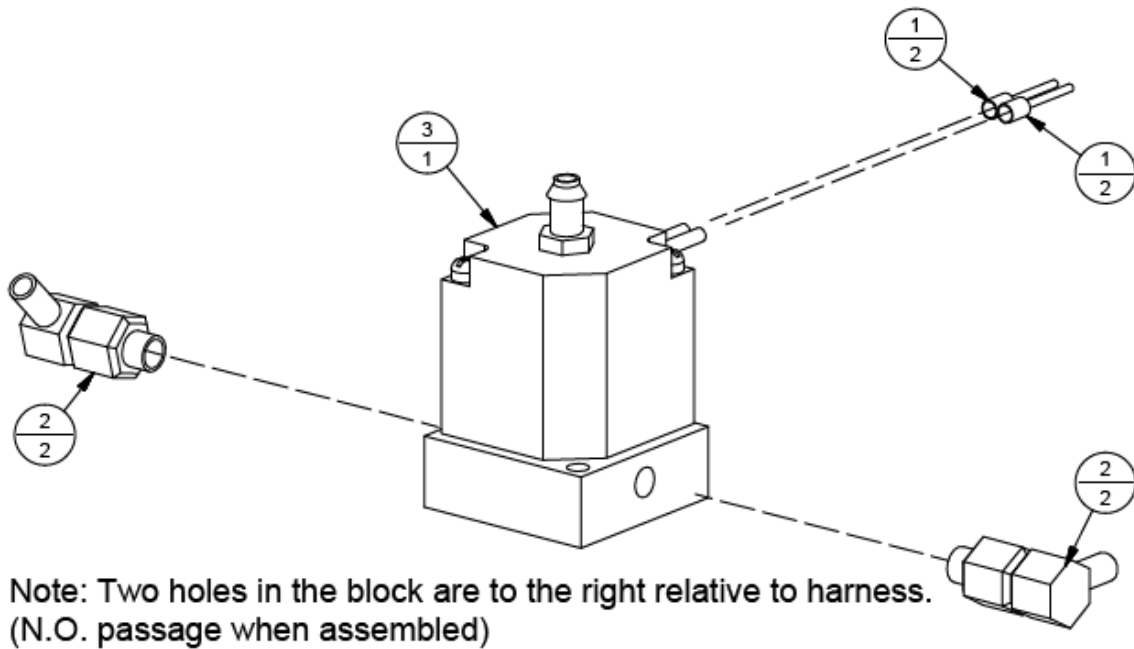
9107911A – Solenoid Valve Assembly, 3-way, Air
